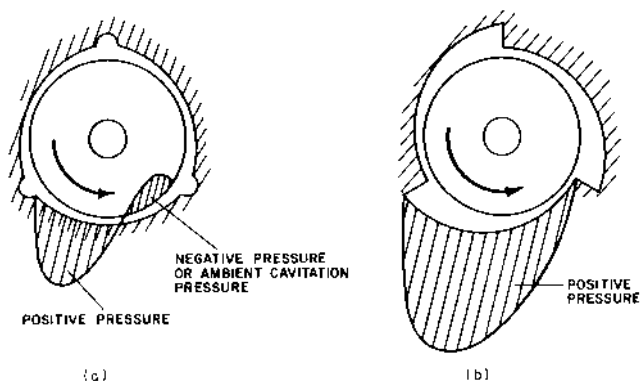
(a) symmetric lobe bearing and (b) canted lobe bearing.
